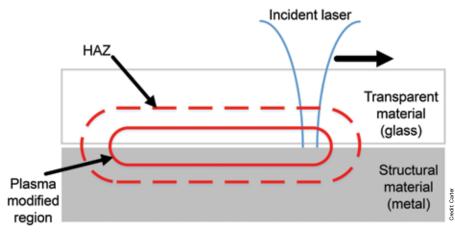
Schematic illustration of ultrashort pulse laser welding. The incident laser is focused through the glass onto the metal surface. By translating the laser along the interface, a weld is formed from an inner plasma affected region and an outer heat-affected zone (HAZ).
